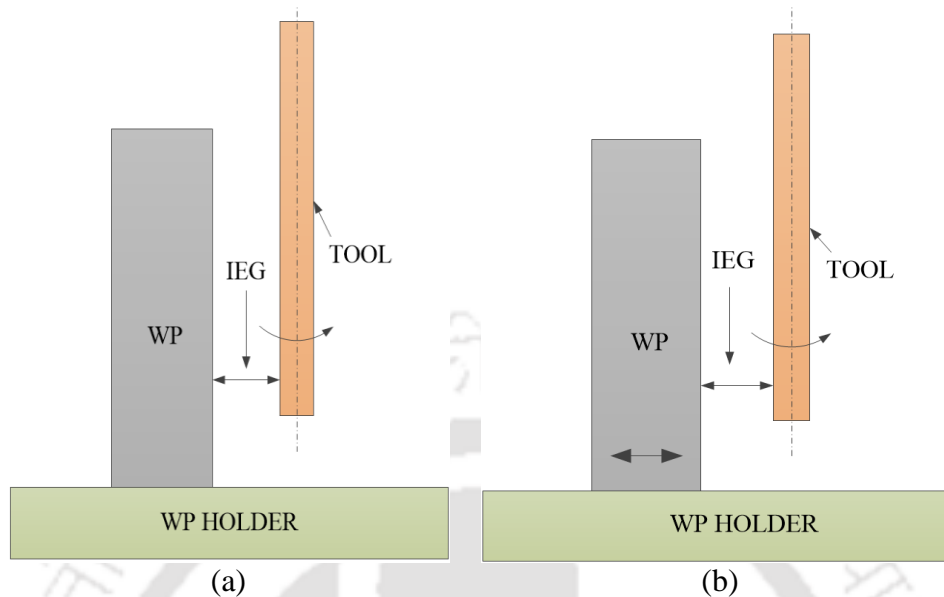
Microtool fabrication using setup2 (a) Fixed Tool and (b) Fixed IEG
